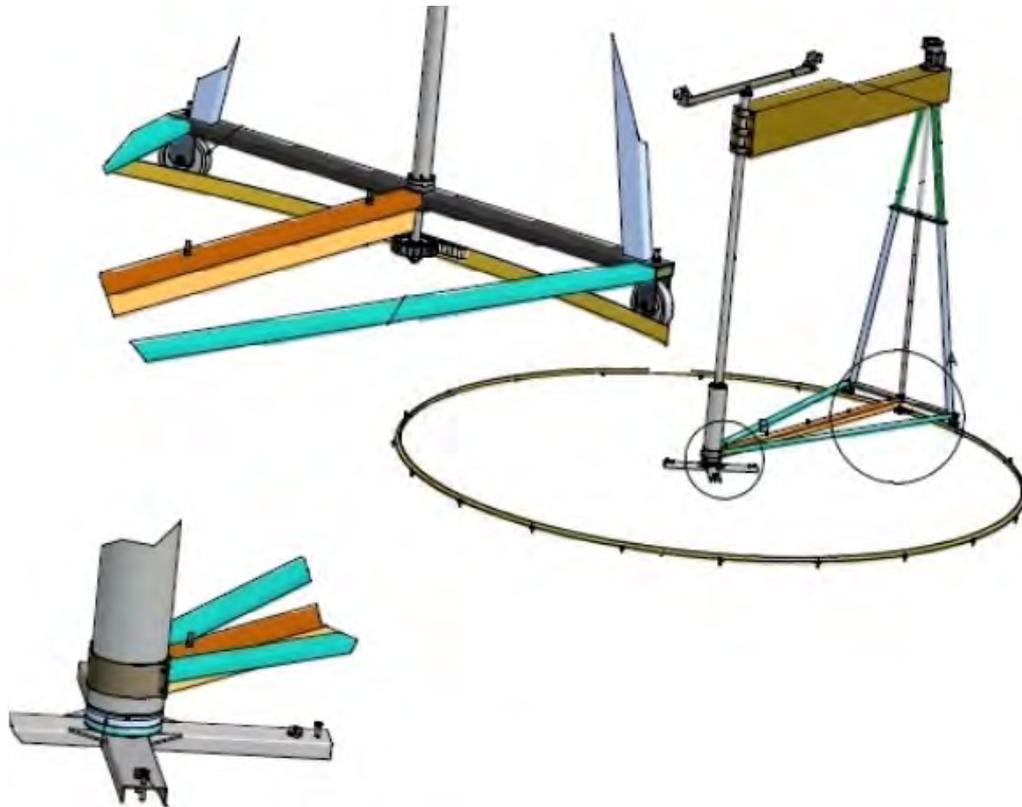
Schematic arrangement with details of the arm installed on the CH-TPN.
